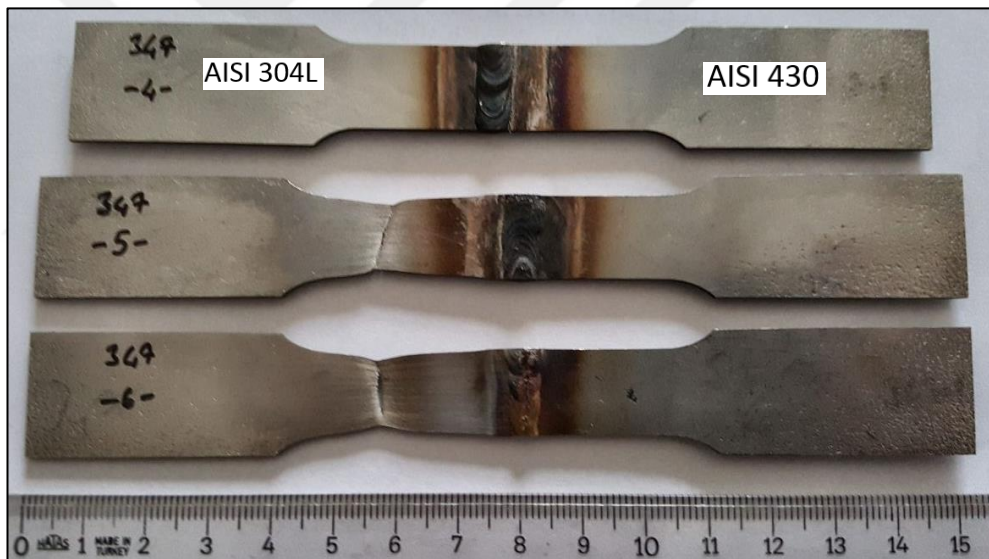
Macro photographs of the refraction areas of the Standard A welded tensile specimens combined with ER347 additional wire.
